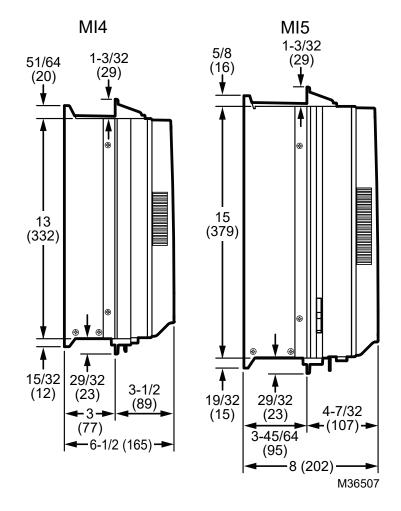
Flange mounting depth dimensions for MI4 and MI5 [Unit: inches (mm)]
